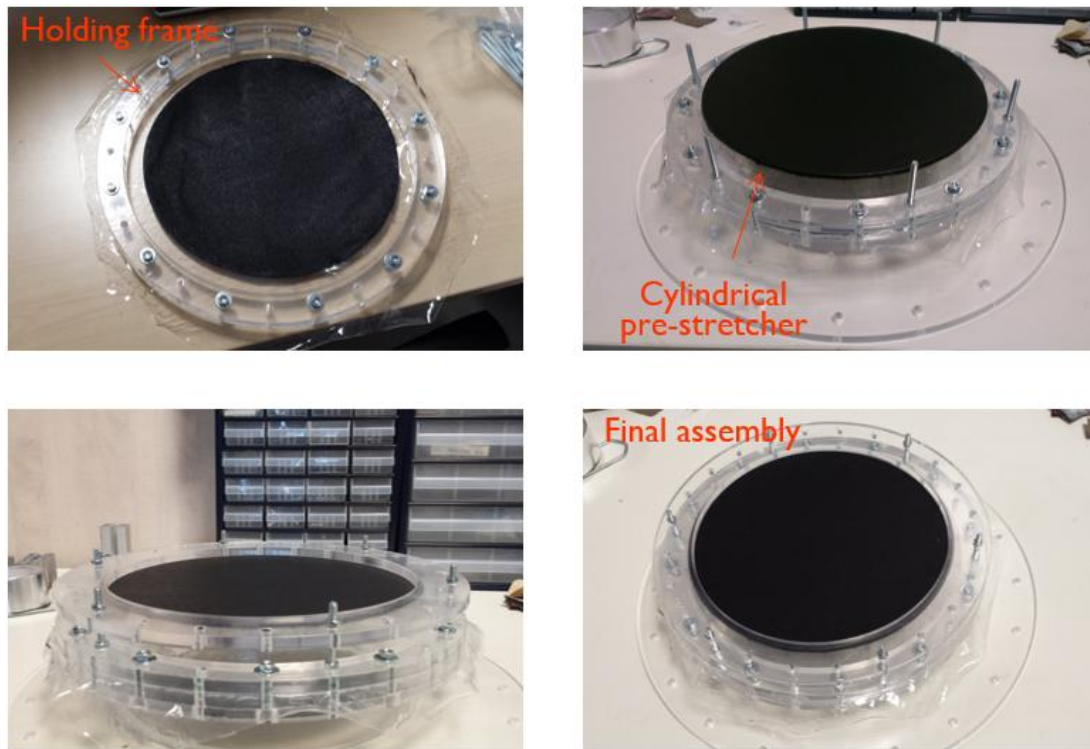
DEG PROTOTYPE ASSEMBLY ON THE PRE-STRETCHER
